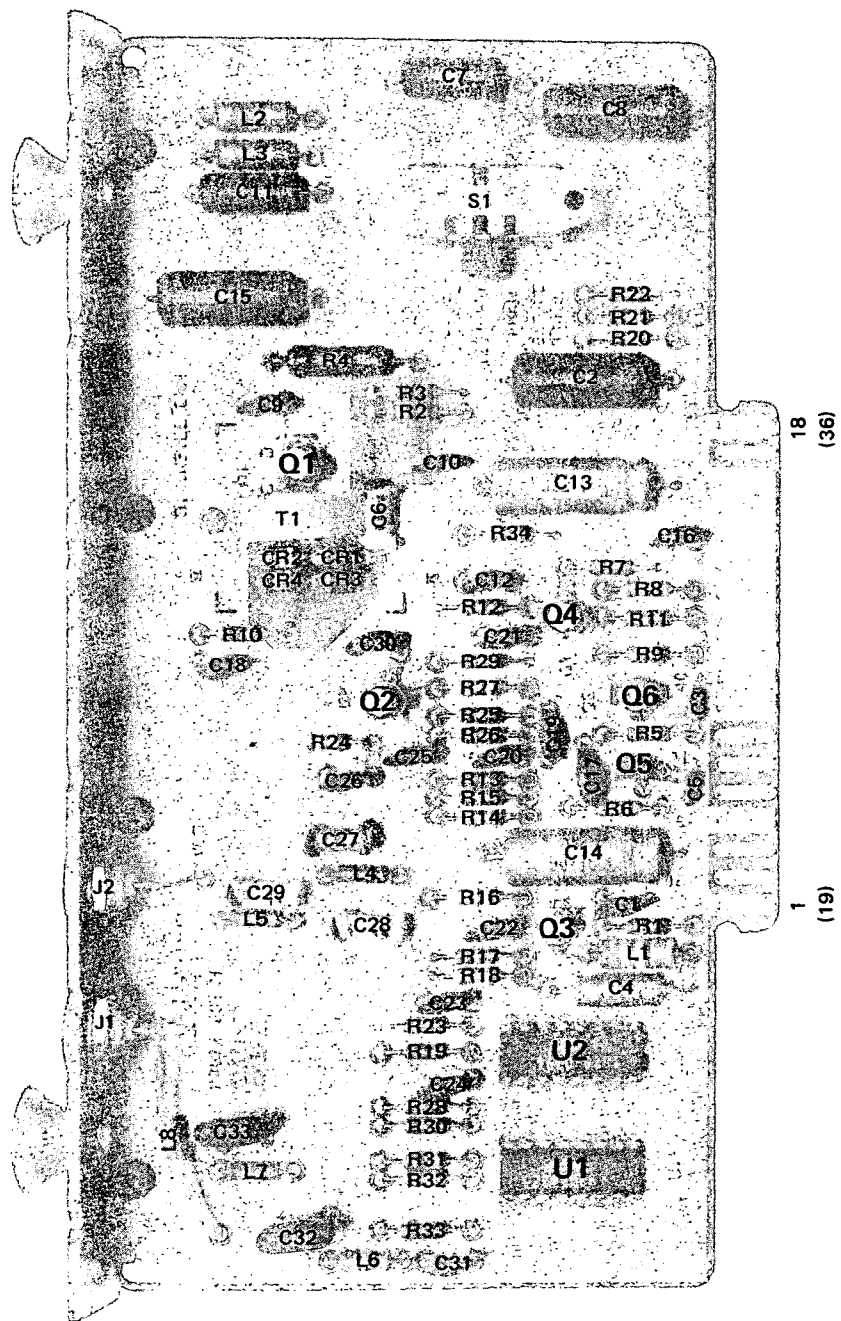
A2A3 VCO 160—240 MHz Assembly Component and Test Point Locations
